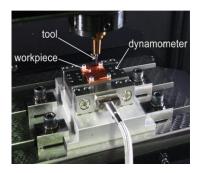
Photograph of dynamometer on the CNC machining centre
